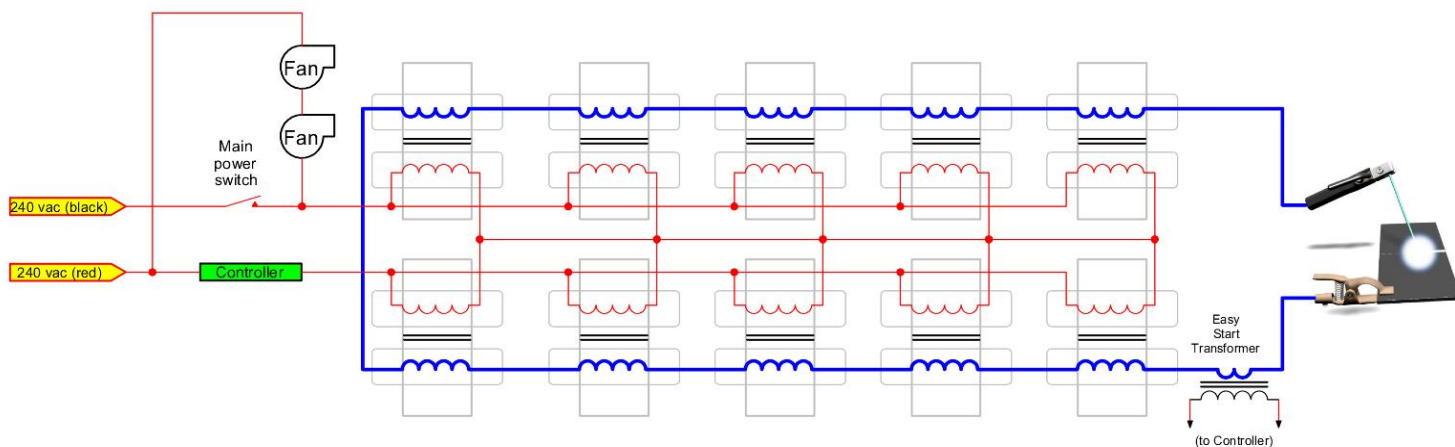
240 volt, 10 transformer welder. You can operate this welder on a 50 amp breaker, but it may trip if the overall wattage of the welder is too great. This would be typically built with smaller than 1500-watt transformers.
